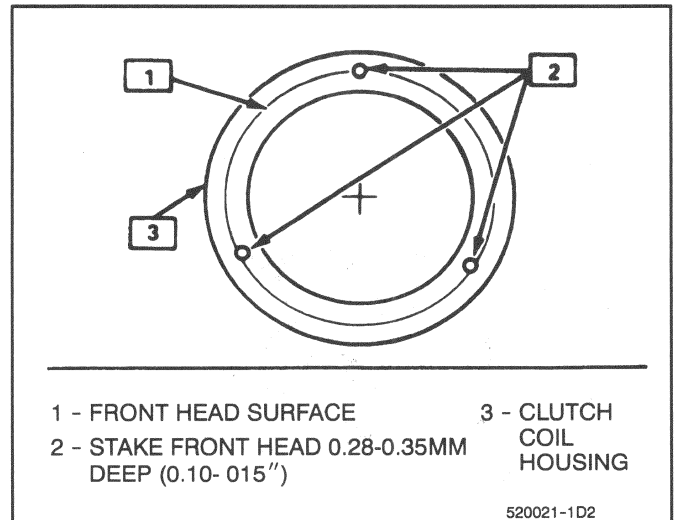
Details of Stakes in Front Head for Clutch Coil
